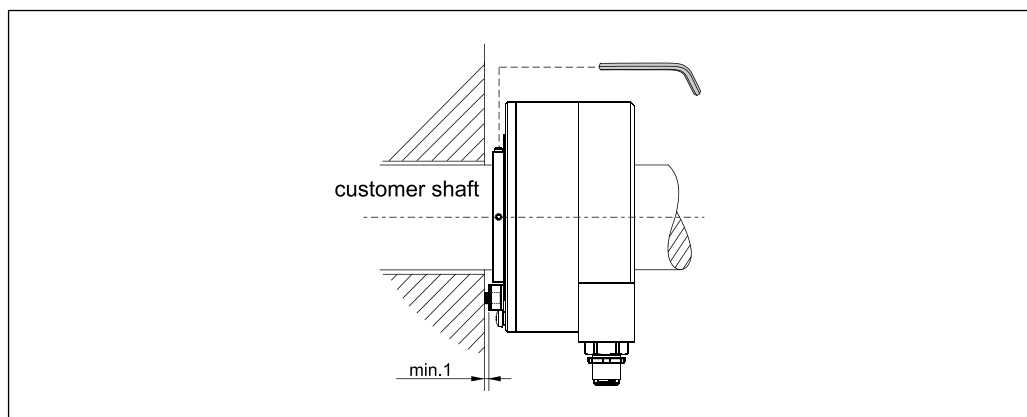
Type with dowel pin and spring torque holder in assembled condition with  $\varnothing 50H7$
